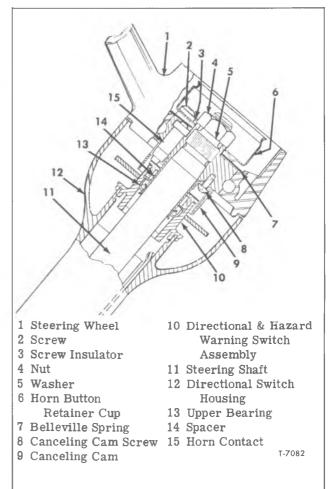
Upper Steering Column Cross Section (Tilt Cab) (Typical)
